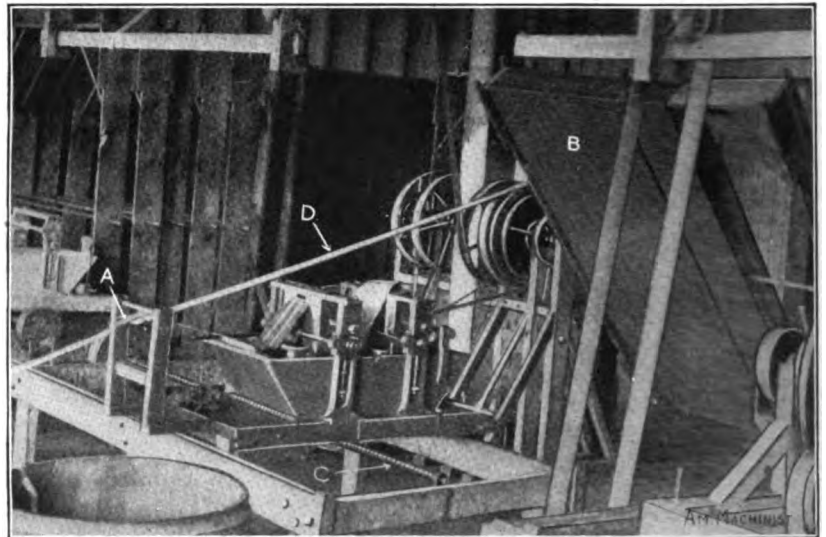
TYPE OF MACHINE USED FOR SIZING AND STARCHING
